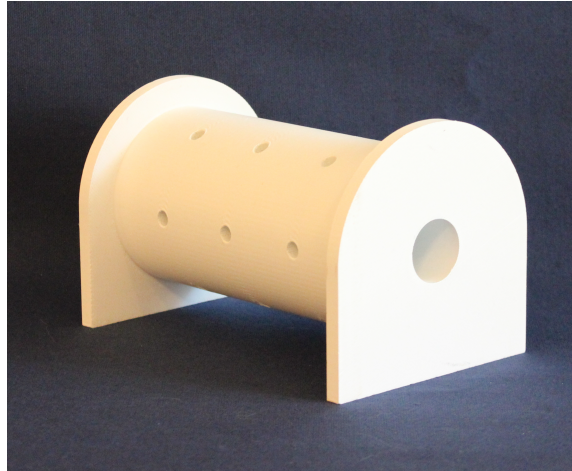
SISO - Nozzle with Radial Perforations - Prototype - Forward View
